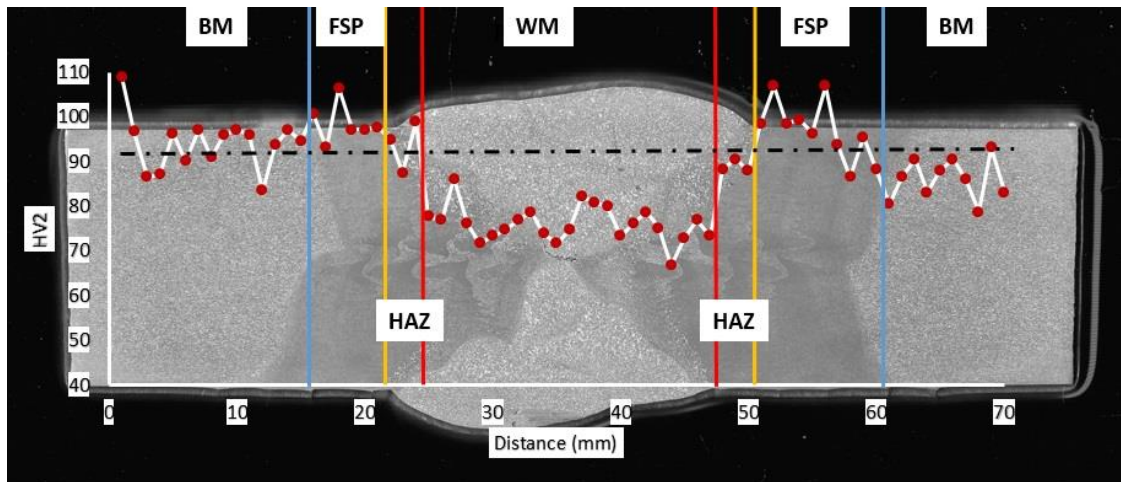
Hardness profile of the FSPed and welded plate (2 mm below surface)
